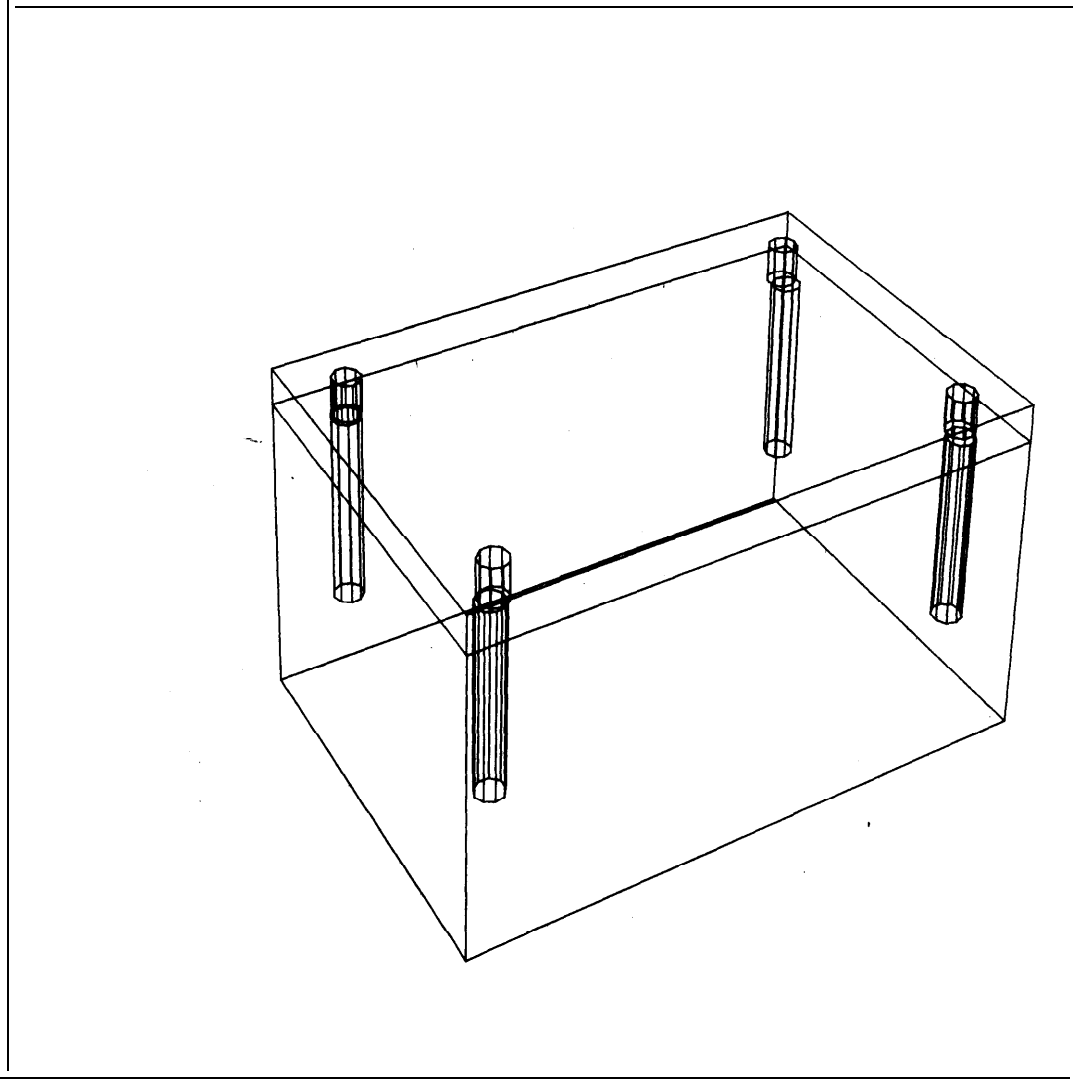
Drawing of Unsuccessful Box and Lid Assembly
